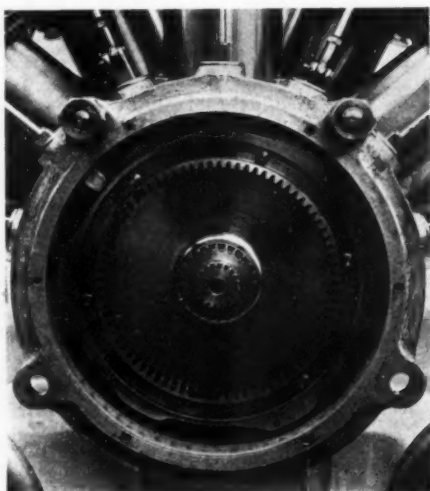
Esnault-Pelterie Seven-Cylinder Aero Engine. Forward End of Crankcase Is Removed, Showing the Single, Double-Faced Cam Operating all Valves.
